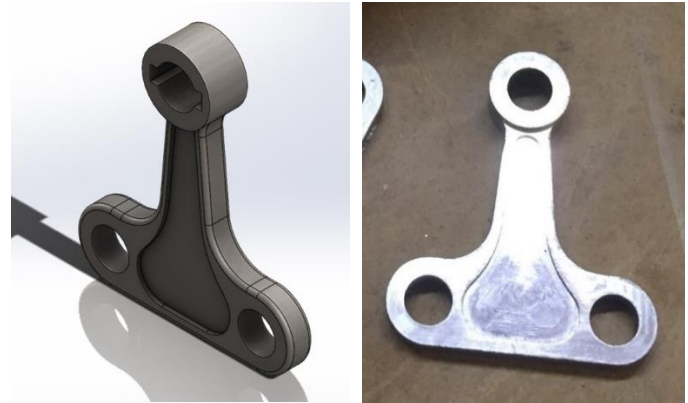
(a) Connecting rod 3D model (b) manufactured component
